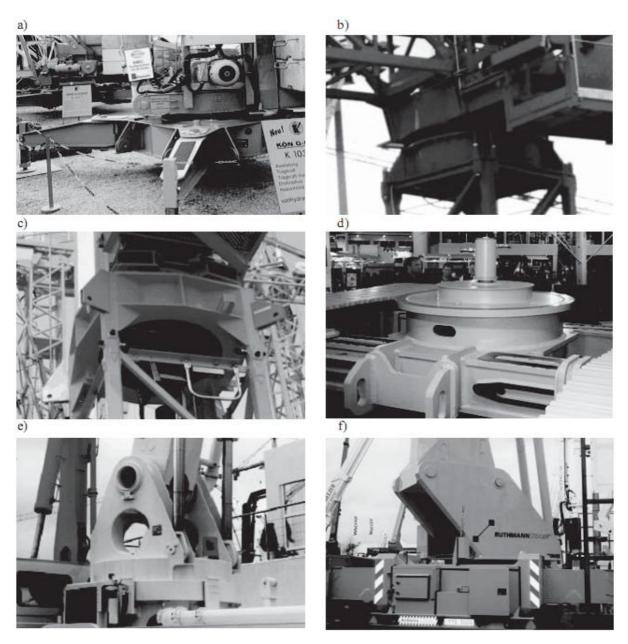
Examples of support surface for radial-axial bearings bond in construction mechanization
